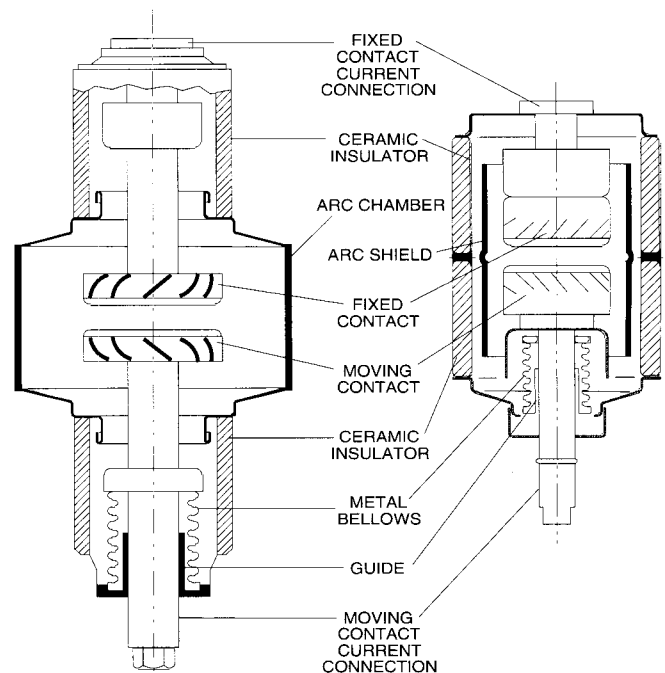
Cutaway View of GMI Vacuum Interrupters.
